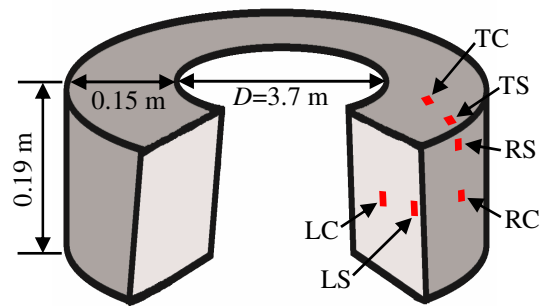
Dimension of the wind tower flange and the sampling locations.
